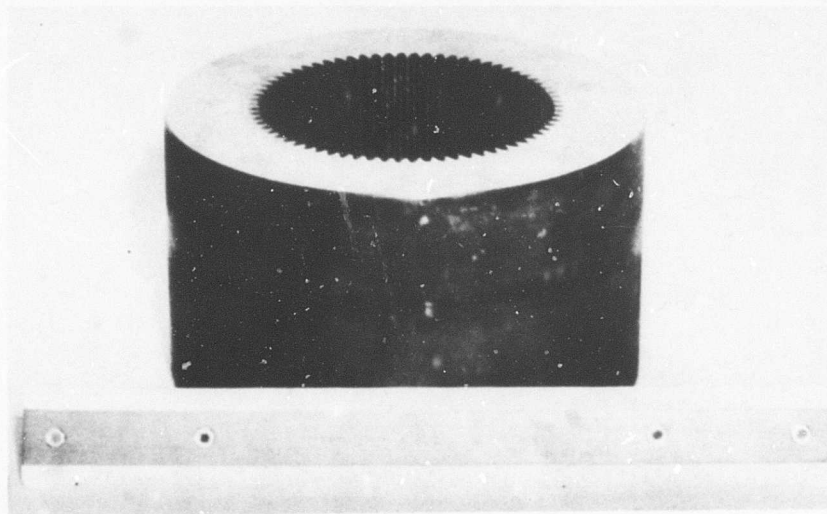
Bottom Die Used in Forging 5-Inch Gears with Integral Teeth.
